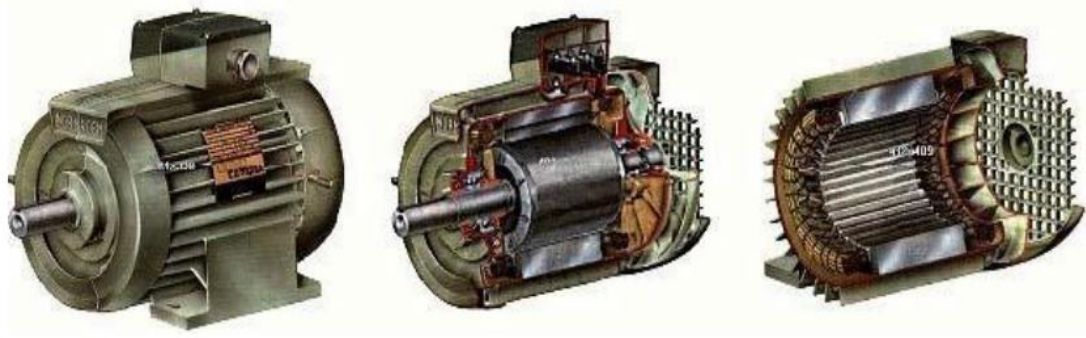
Structure of the asynchronous squirrel-cage machine [2].
